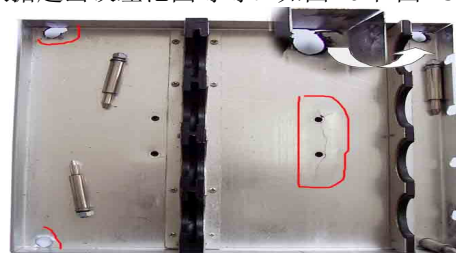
Flap to concuss instrument tray to appear crack and stud bolt to shed off
